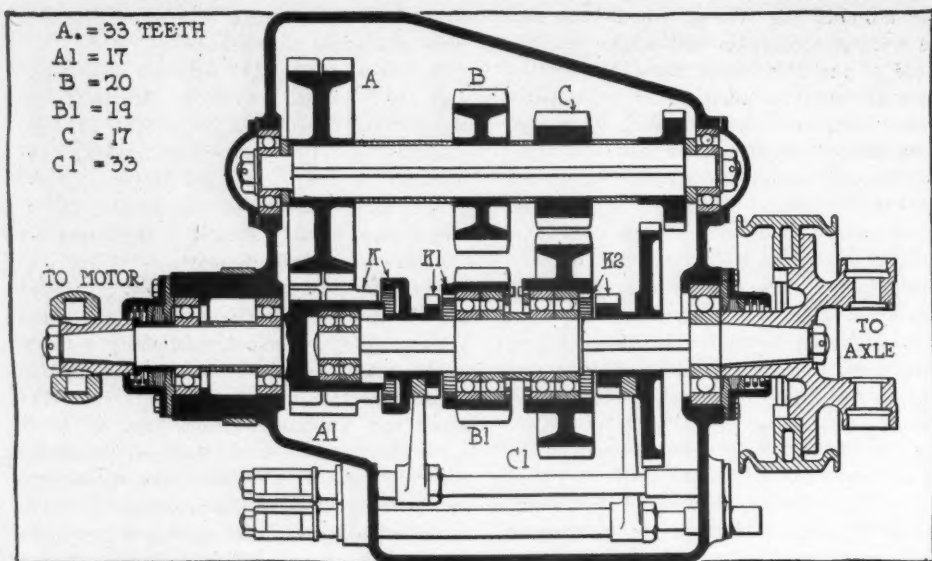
EXAMPLE OF CHAIN-DRIVEN GEARBOX FOR TOURING CAR
